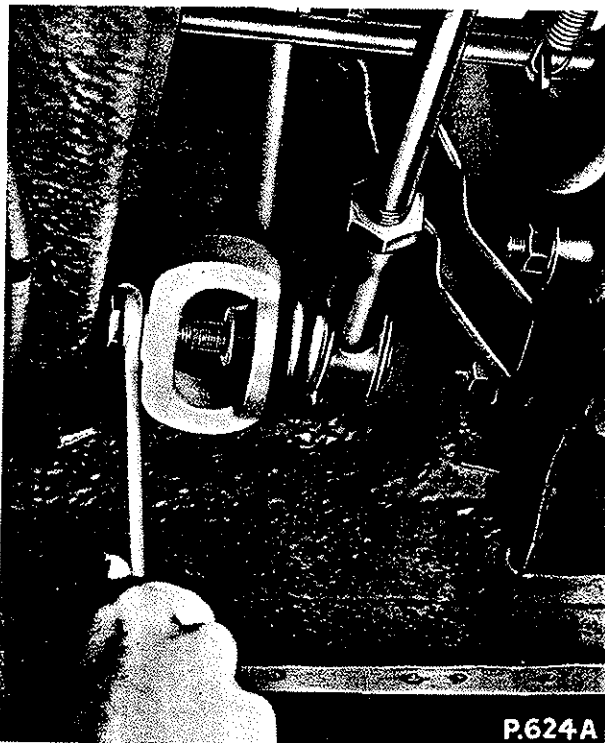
Disconnecting the side steering rod at the drop arm using the Churchill Extractor R.G.284
